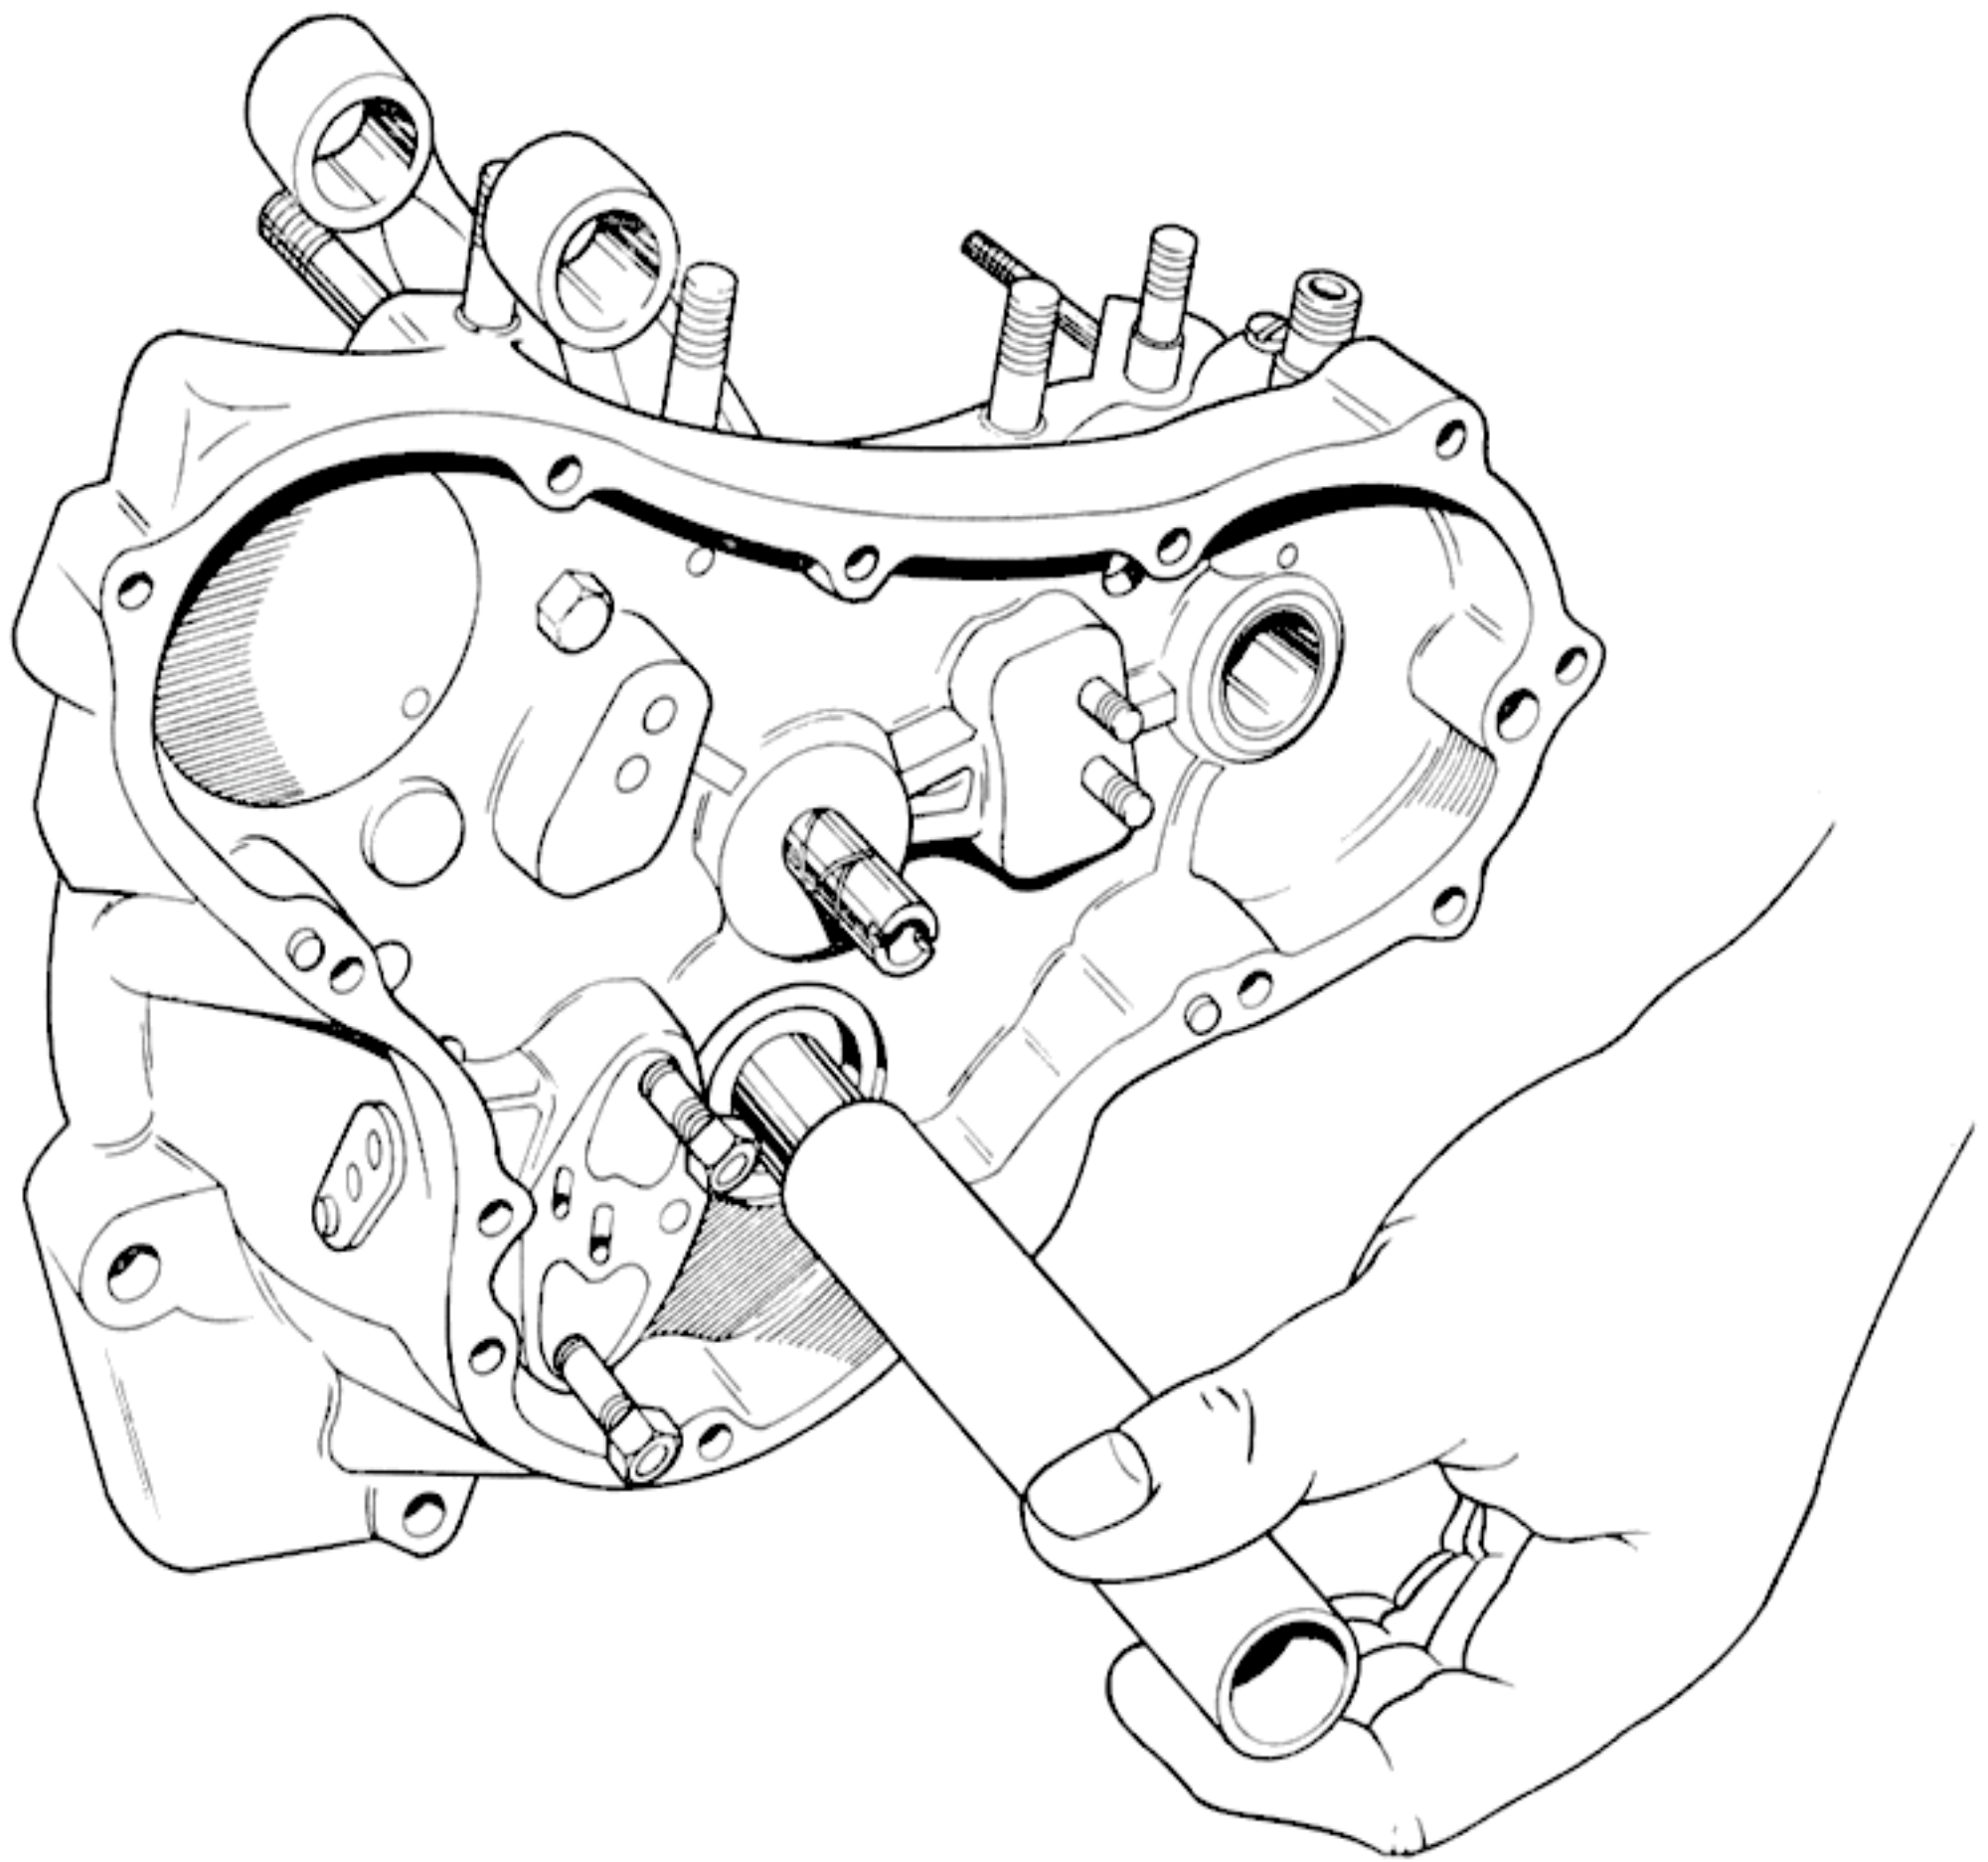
Extracting crankshaft pinion using tool ET 2003
